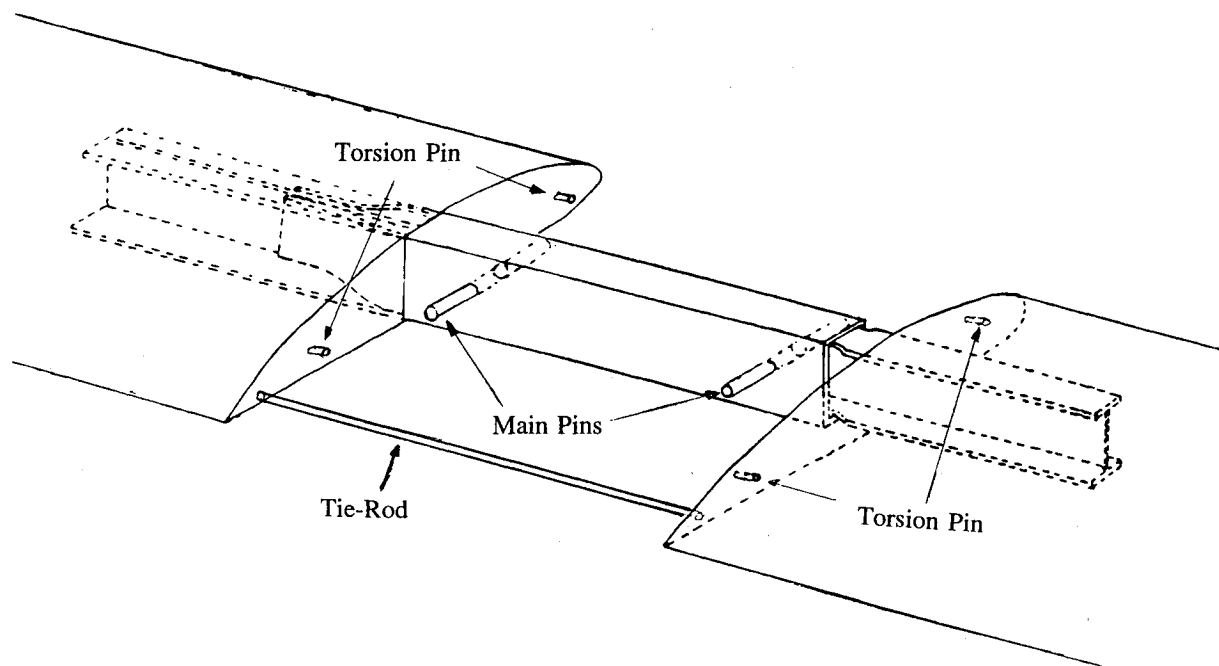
Cutaway diagram of RP-3 carry-through assembly.
